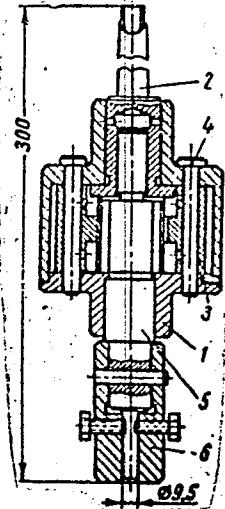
Impact tool: 1 - body; 2 - shank; 3 - hammer; 4 - pin; 5 - driven shaft; 6 - tool holder.
